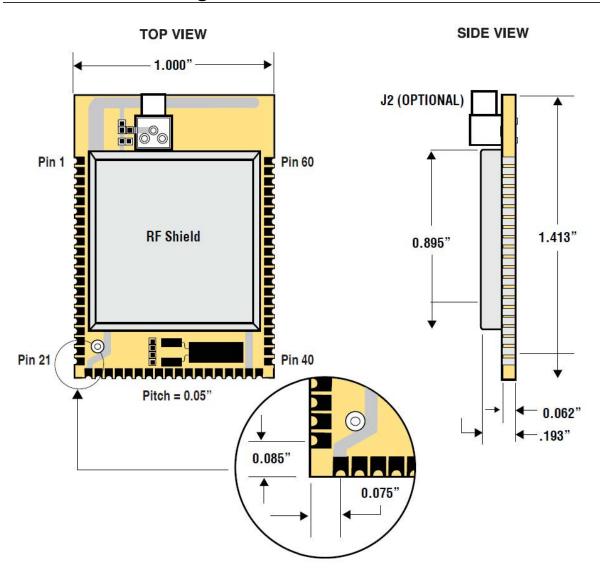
Mechanical drawings of the SM700PC1 Module
